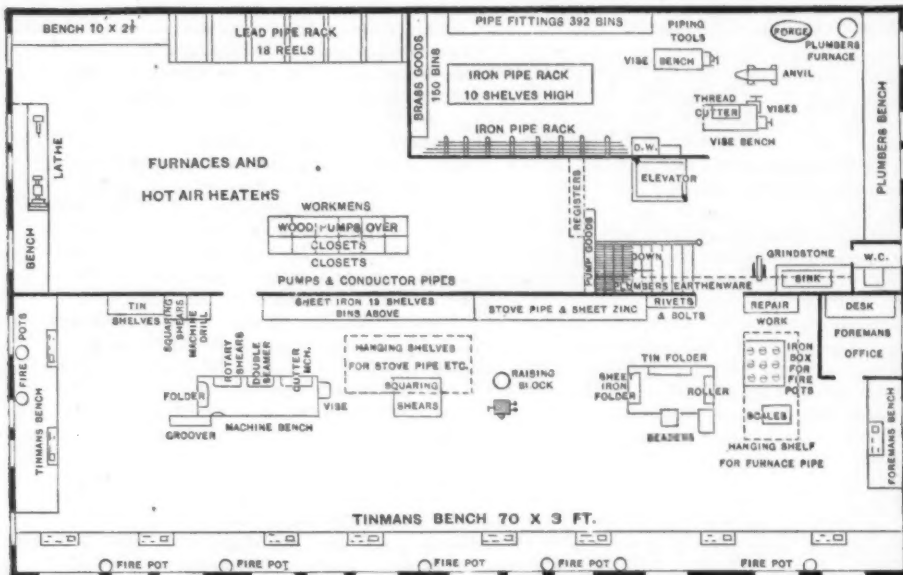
Shop of W. D. Parlin, Natick, Mass.—Floor Plan.
